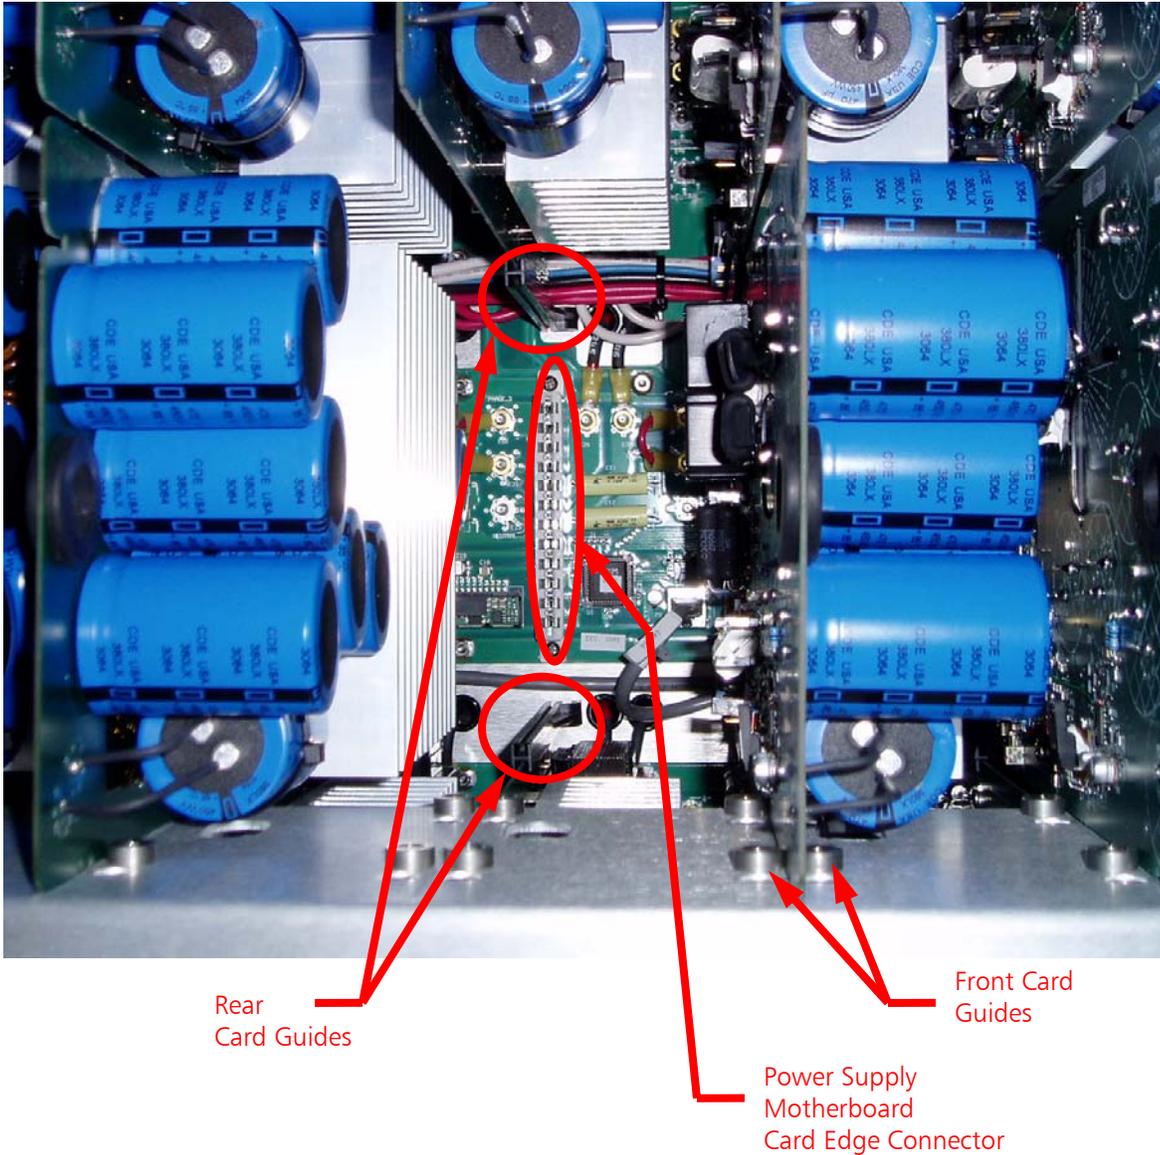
View of Power Supply Motherboard (Power Supply Module Removed)
